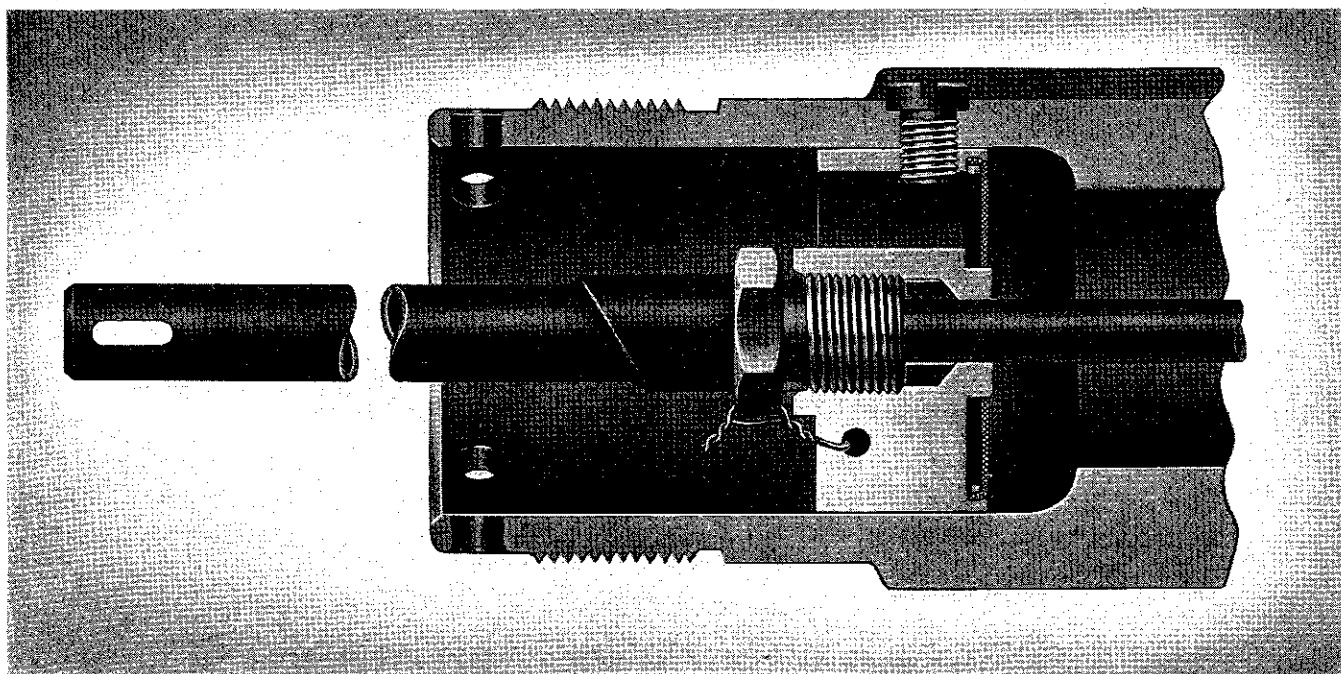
Oil Supply Pipe Installed in Propeller Shaft
